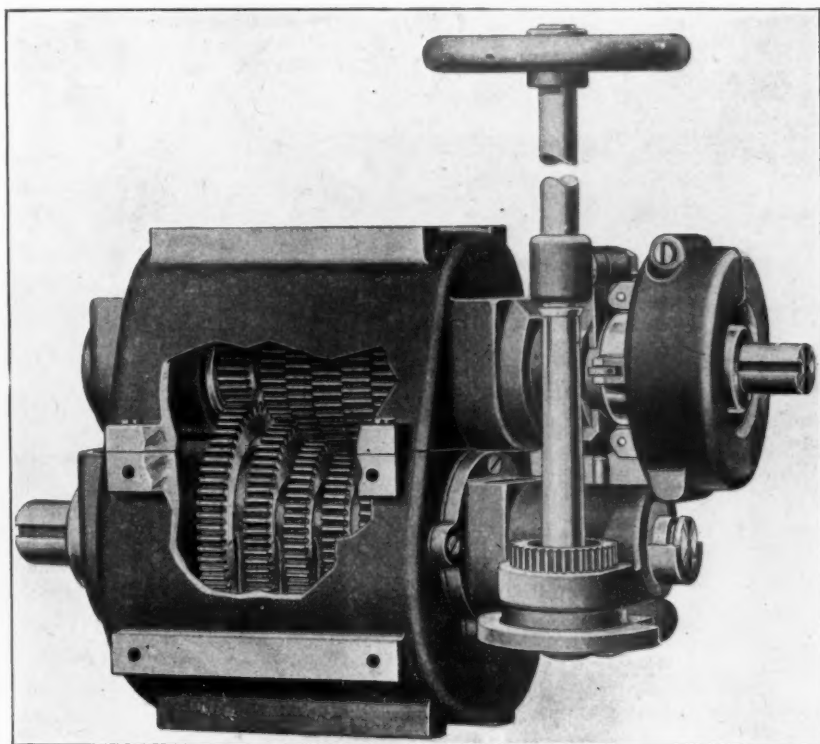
GENERAL VIEW OF THE NEW SPEED CHANGER, SHOWING PADS FOR ATTACHING TO HANGER OR MACHINE.
